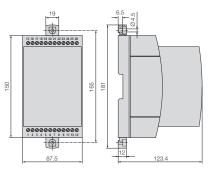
SINEAX DME 401 in housing T24, screw hole mounting brackets pulled out.
